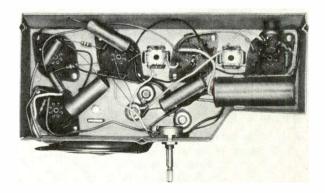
Bottom View of Model 542 Showing Completed Wiring.
